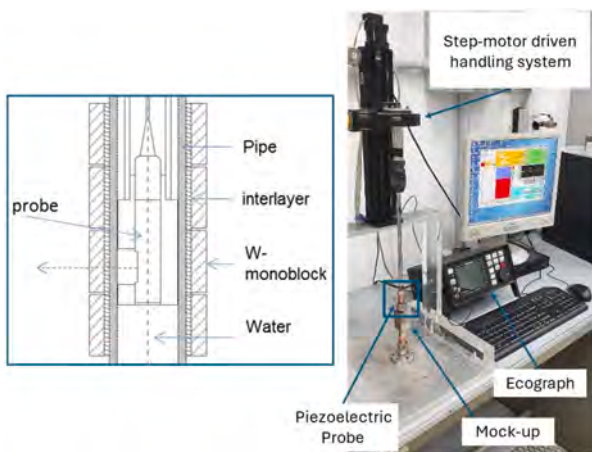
The employed UT equipment with an axial cross section drawing of the mock-up, showing the probe holder inside the pipe, which ensures the correct probe alignment.
